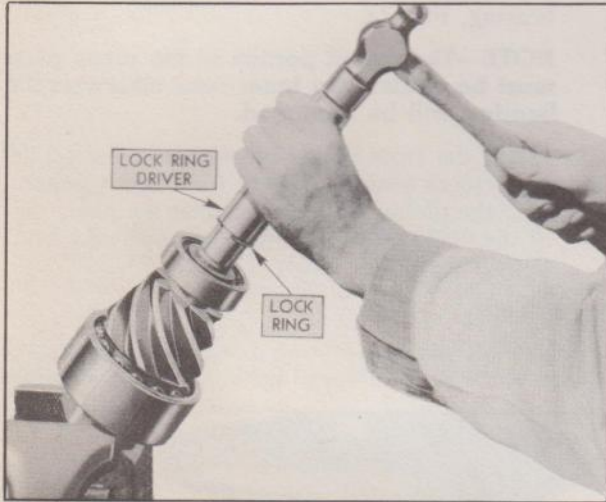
Rear Pinion Bearing Lock Ring Installer
